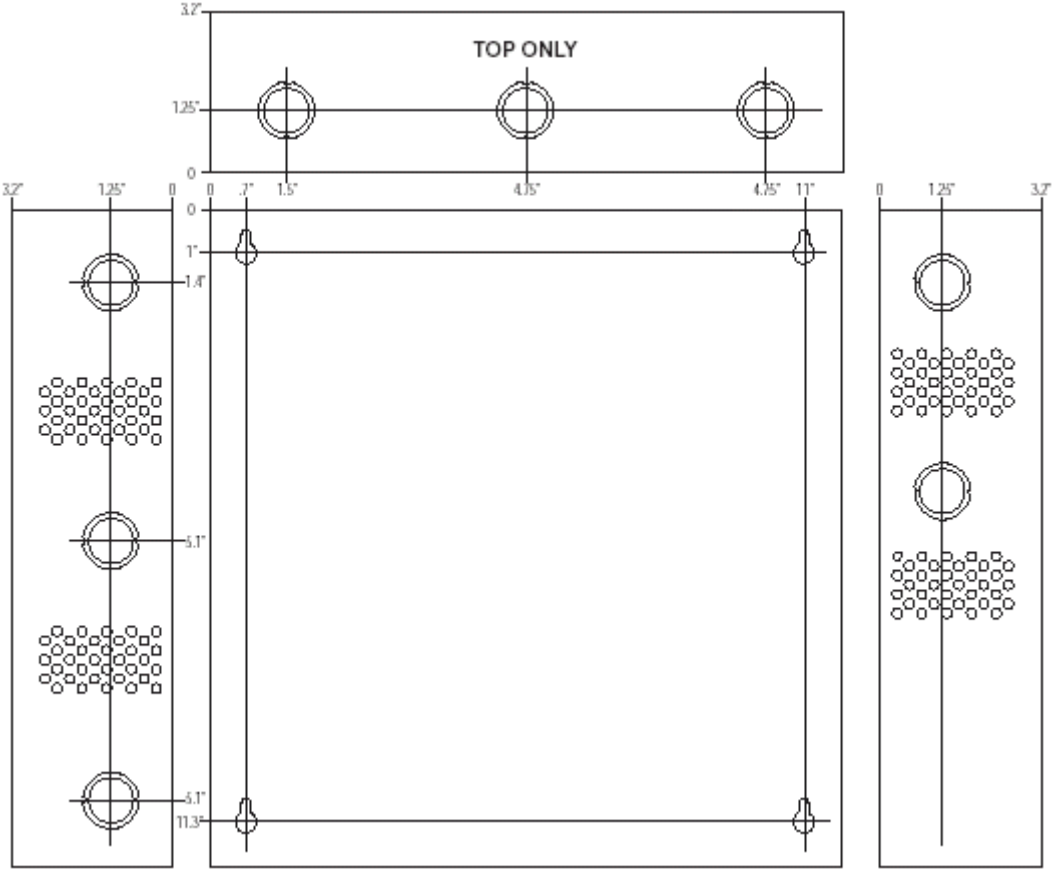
Altronix AL400UL3 Power Supply/Charger Cabinet layout
